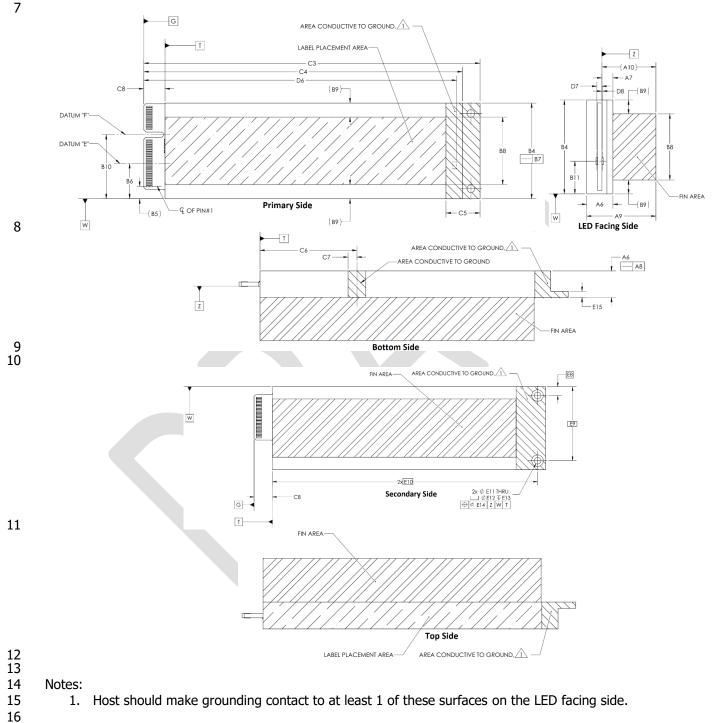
1U Short Form Factor drawing with Optional Asymmetric Enclosure
